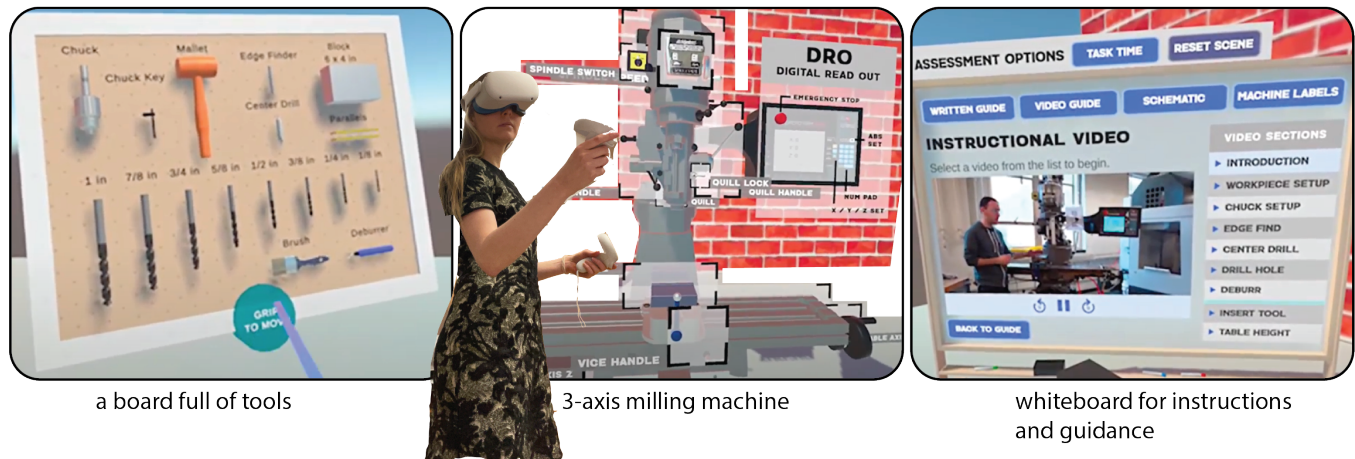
The VR simulation has three components a) a board full of tools b) a 3-axis manual milling machine, and c) a whiteboard of instructions and guidance. With these components, our system guides the users through the training steps for drilling.
